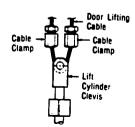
CONNECTING DOOR LIFTING CABLE.
